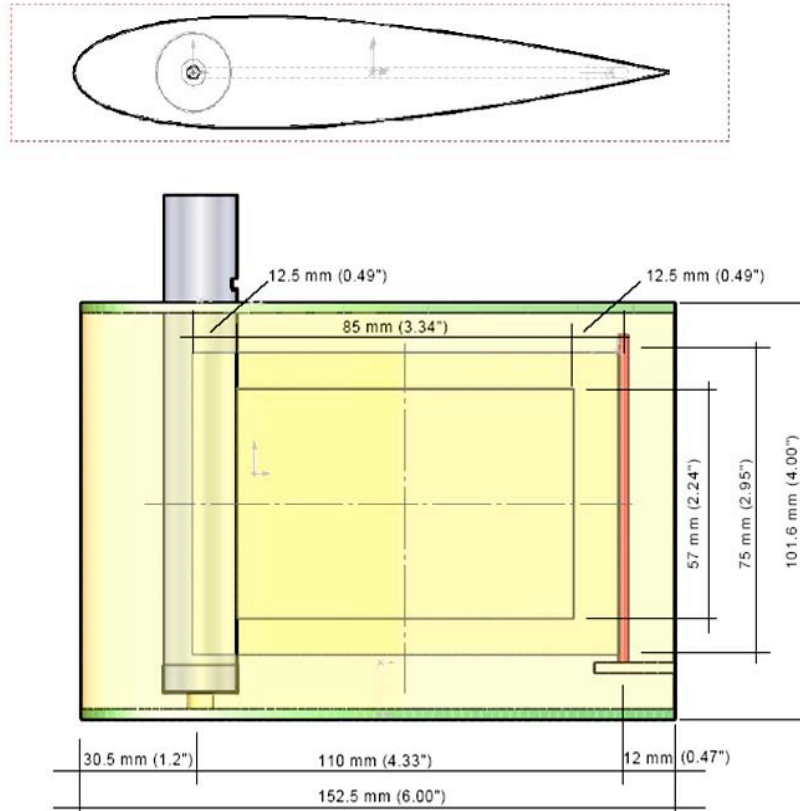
Drawing of Smart Fin Assembly with Approximated Dimensions.
